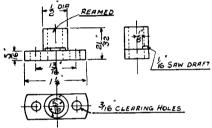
Carrier for locking-pin, 2 off, M.S. machined all over.
